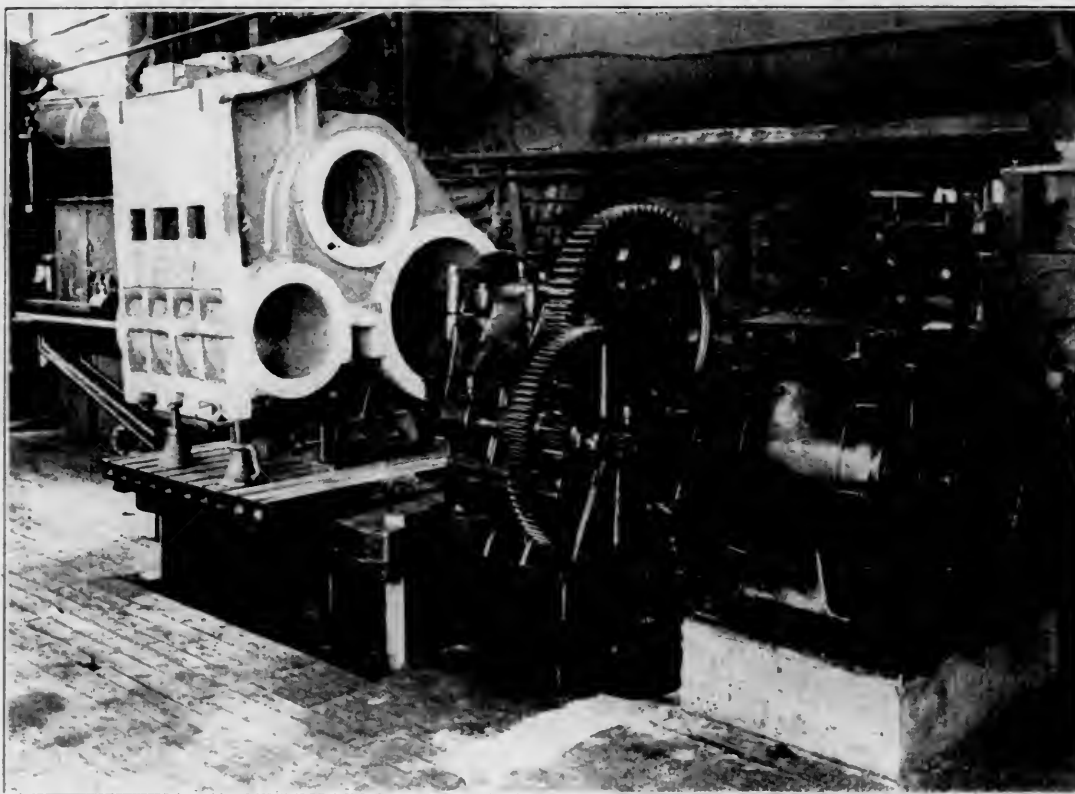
IMPROVED CYLINDER BORING MACHINE ENTIRELY RECONSTRUCTED IN RAILROAD SHOP AND TOOL ROOM. THIS IS AN EXAMPLE OF THE FACILITY WITH WHICH EVEN LARGE SPECIAL MACHINES MAY BE PRODUCED BY A THOROUGHLY ARRANGED AND EQUIPPED TOOL ROOM AND FORCE. THIS MACHINE WILL BORE, FACE AND FINISH COMPLETE AN 18-INCH SINGLE CYLINDER IN FROM TWO TO THREE HOURS, WHICH IS EQUAL TO THE PERFORMANCE OF ANY COMMERCIAL TOOL.
